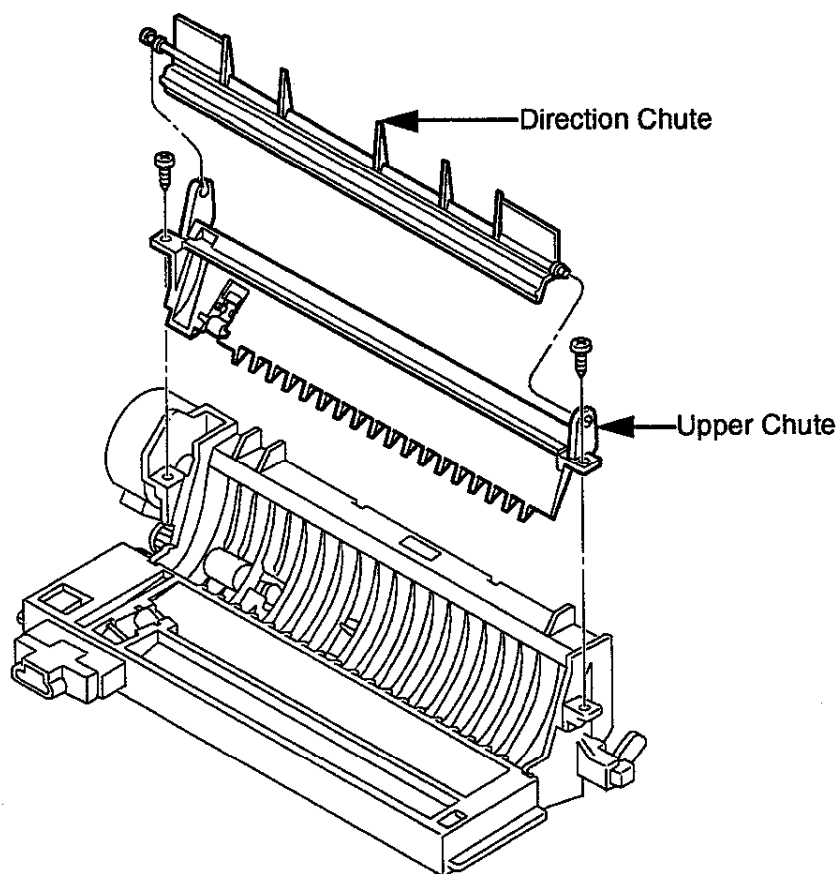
Removing the Direction Chute and the Upper Chute
